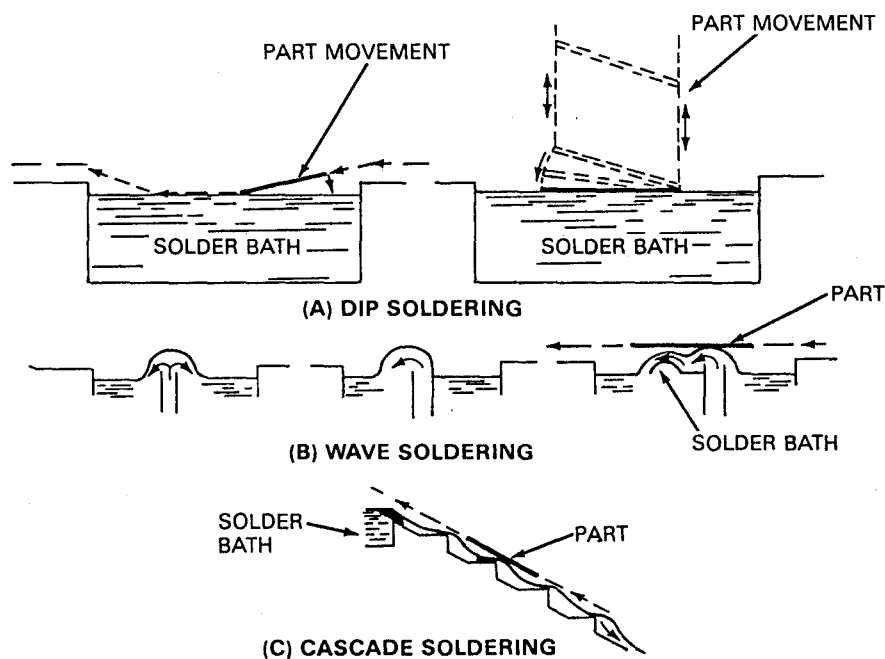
Several Soldering Techniques Used for Large Production Runs
